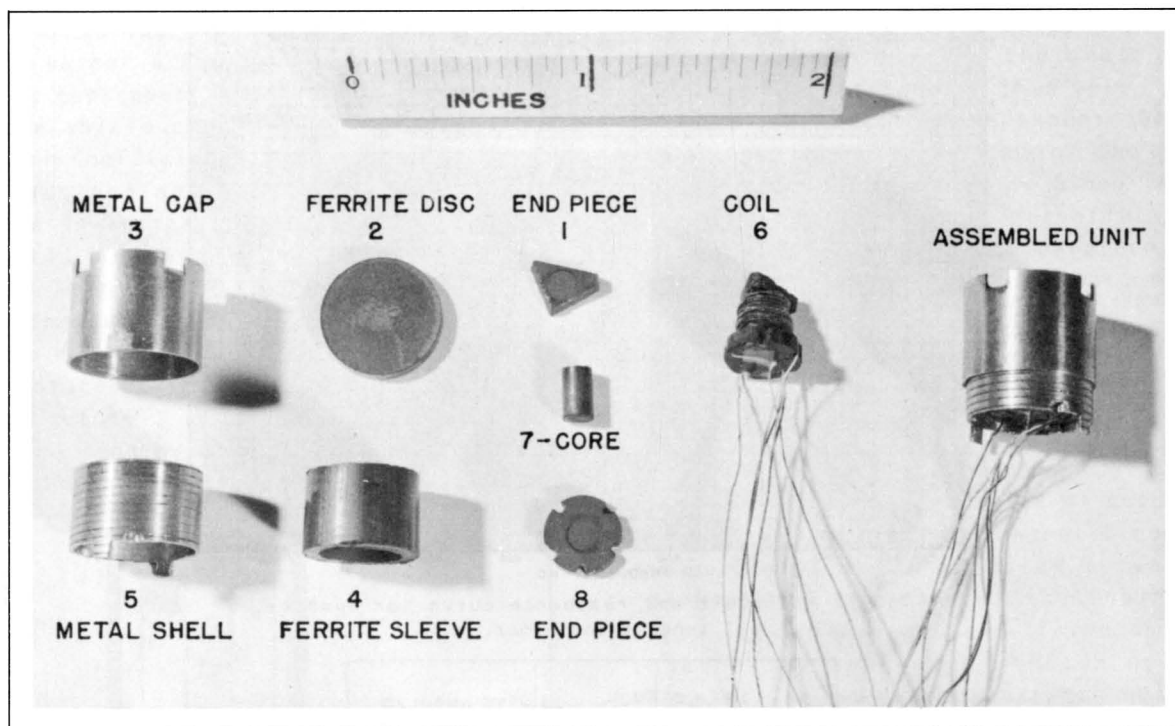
Assembled and exploded views of bobbin-type i-f transformer.
